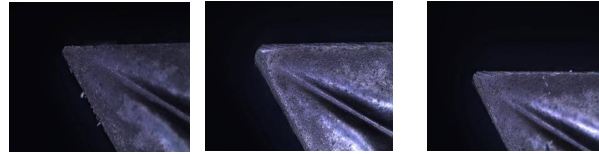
Tungsten carbide tool with 0, 0.1 & 0.2mm flank wear.
